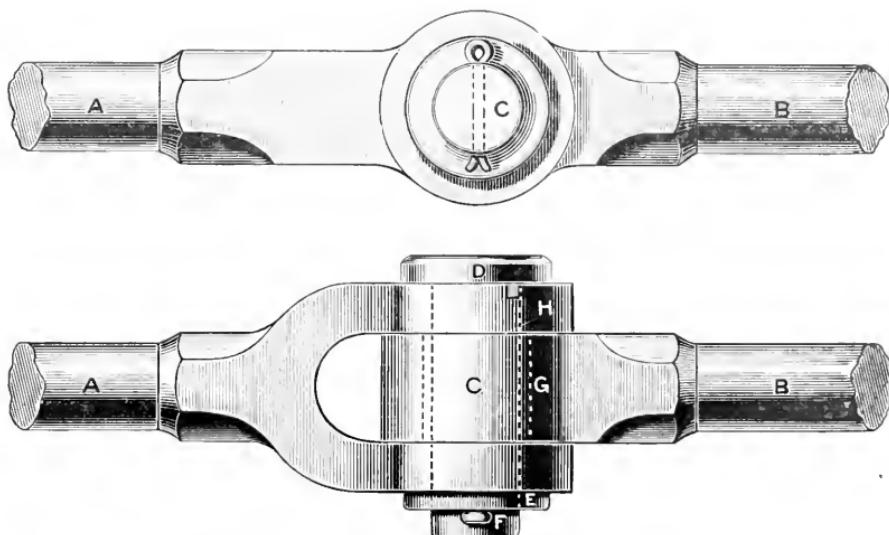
KNUCKLE JOINT. (Page 69.)
